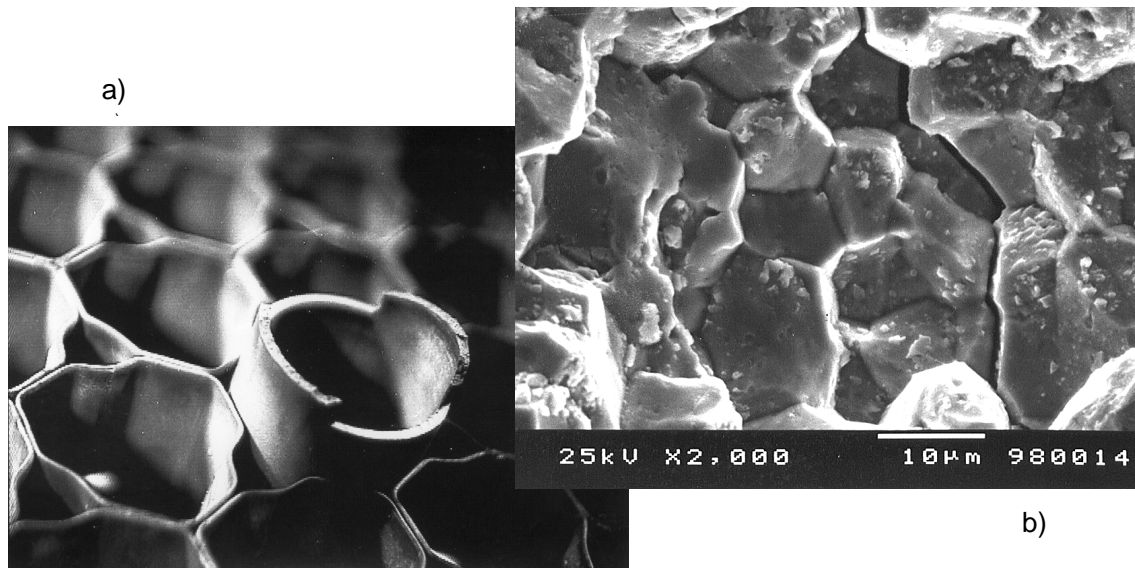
A macrograph (a) and the intergranular fracture surface (b) of the failed spacer grid sleeve.
